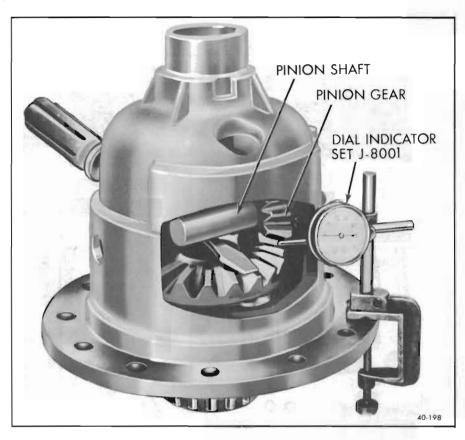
Checking Side Gear To Pinion Gear Backlash
